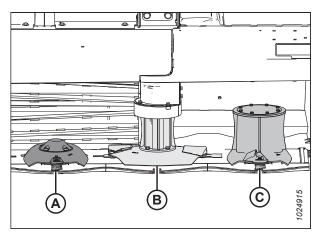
Disc Assemblies – 10 Disc Shown, 8 Disc Similar
